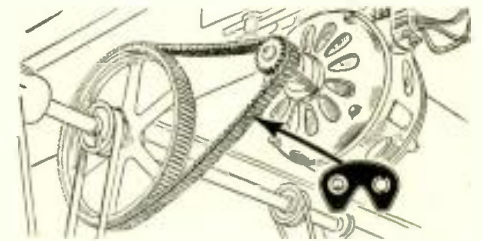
Chain Drive from Electric Motor to Line Shaft.
